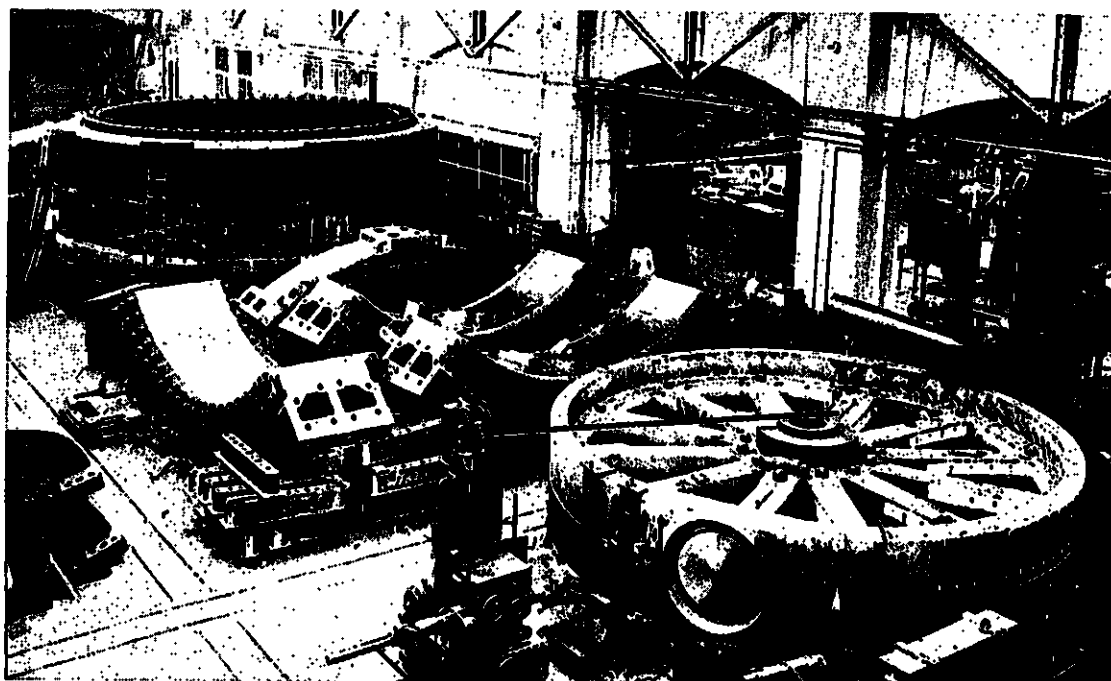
View in the shops showing parts of the Lilla Edet generators.
